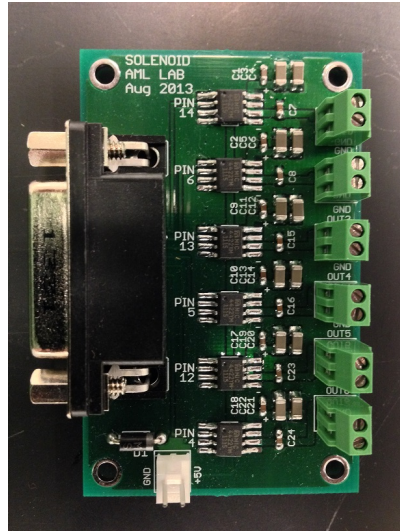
Top side of populated Solenoid Board showing the MIC4422s; The keyed two-pin header allows for external power to be supplied when the board is not connected to the Interface Board Extension; The terminal blocks connect to the MIC4422s for control of solenoids or other relays.
